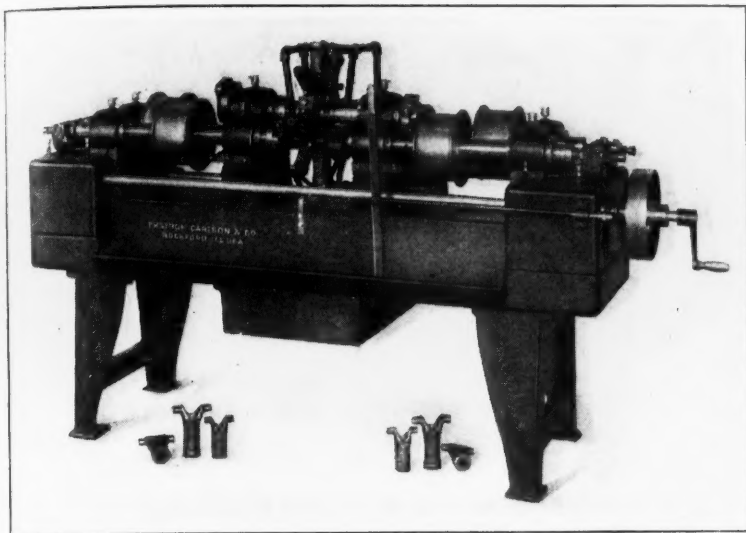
Automatic Machine for Finishing Ends of Universal-joint Yokes
